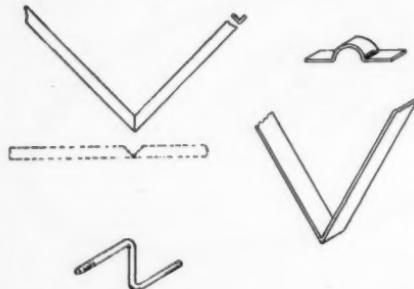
Examples of work that can be formed with the bench bending fixture.
